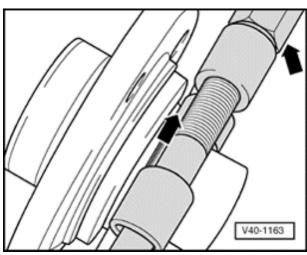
Pressing wheel bearing out of wheel bearing housing with 82 mm diameter
